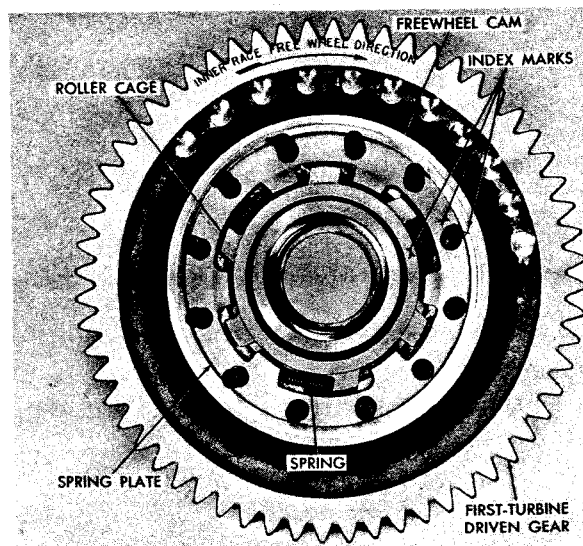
Freewheel clutch installed in first-turbine driven gear (in units with S/N 152 and above)
